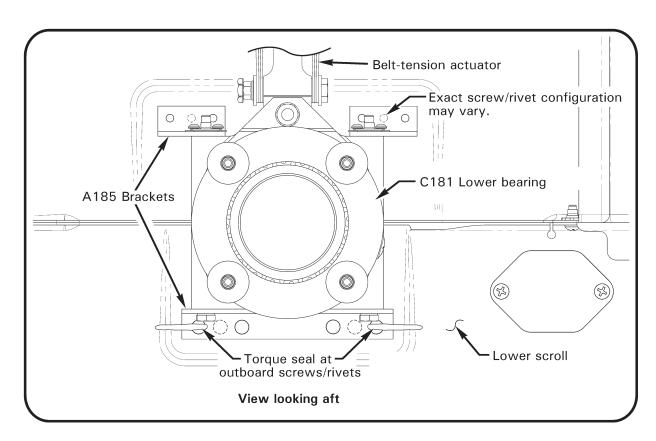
ACTUATOR LOWER BEARING A185 BRACKETS
